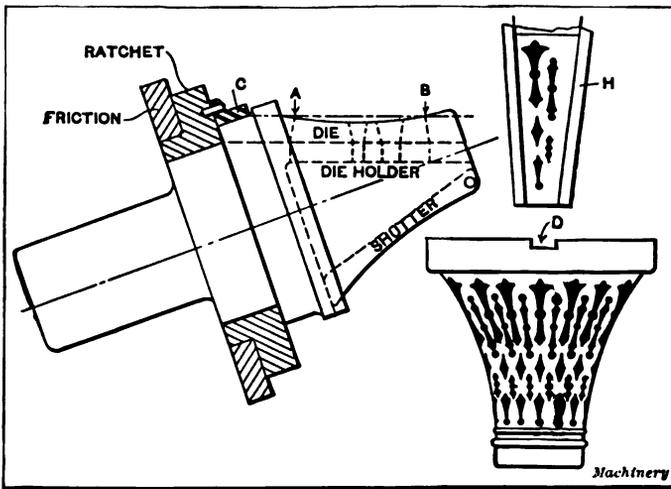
Die and Holder for Perforating Shell shown to the Right
